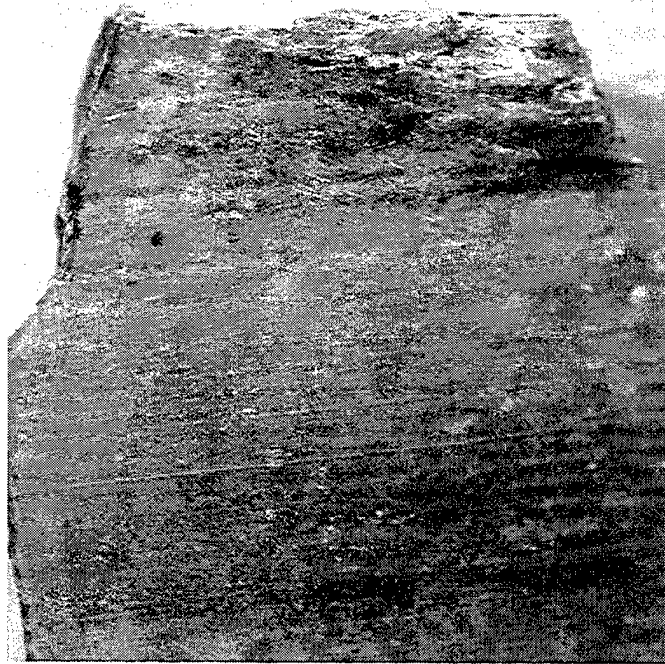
Enlarged view of the rivet hole edge with a crack (arrow) in the small angle piece (A) in Figure 20. Magnification: 15 \times .
